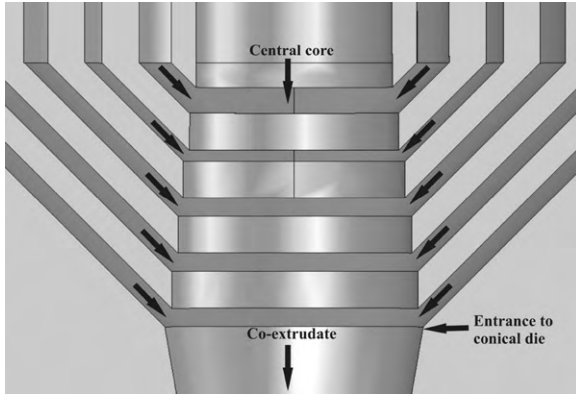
Co-extruder nozzle design using a core paste instead of a mandrel, which if a sacrificial material is used will produce a tubular structure.
